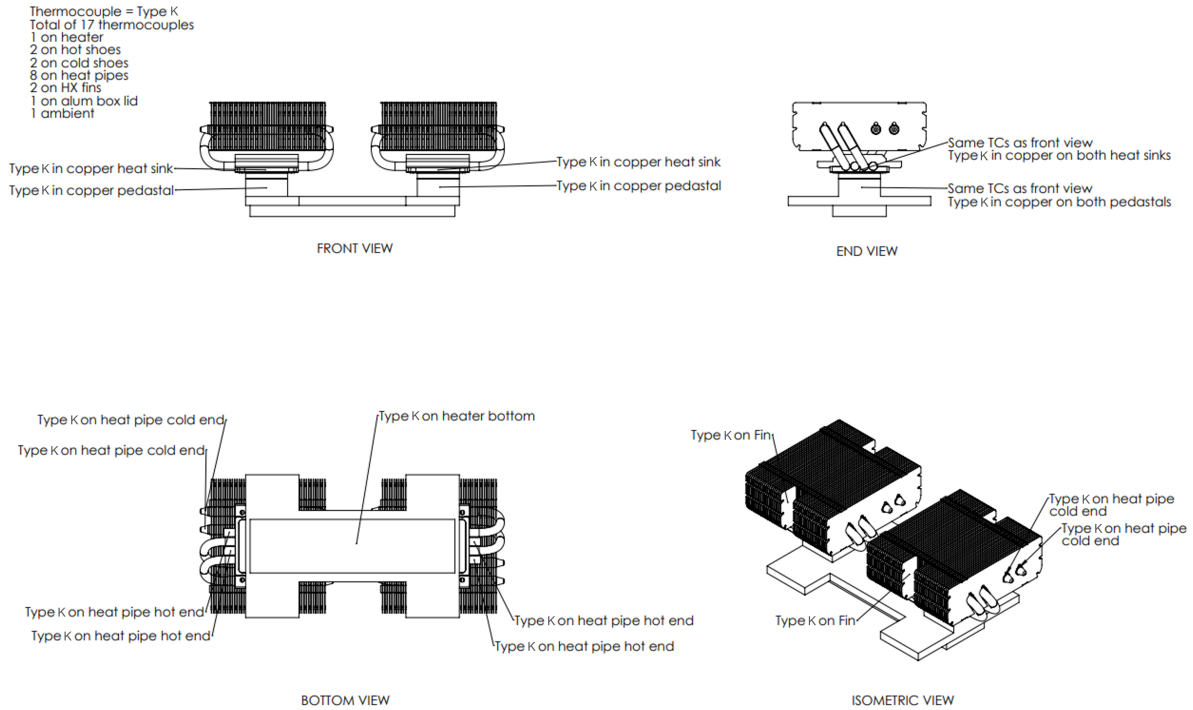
Assembly drawing showing the K-type thermocouple locations.
